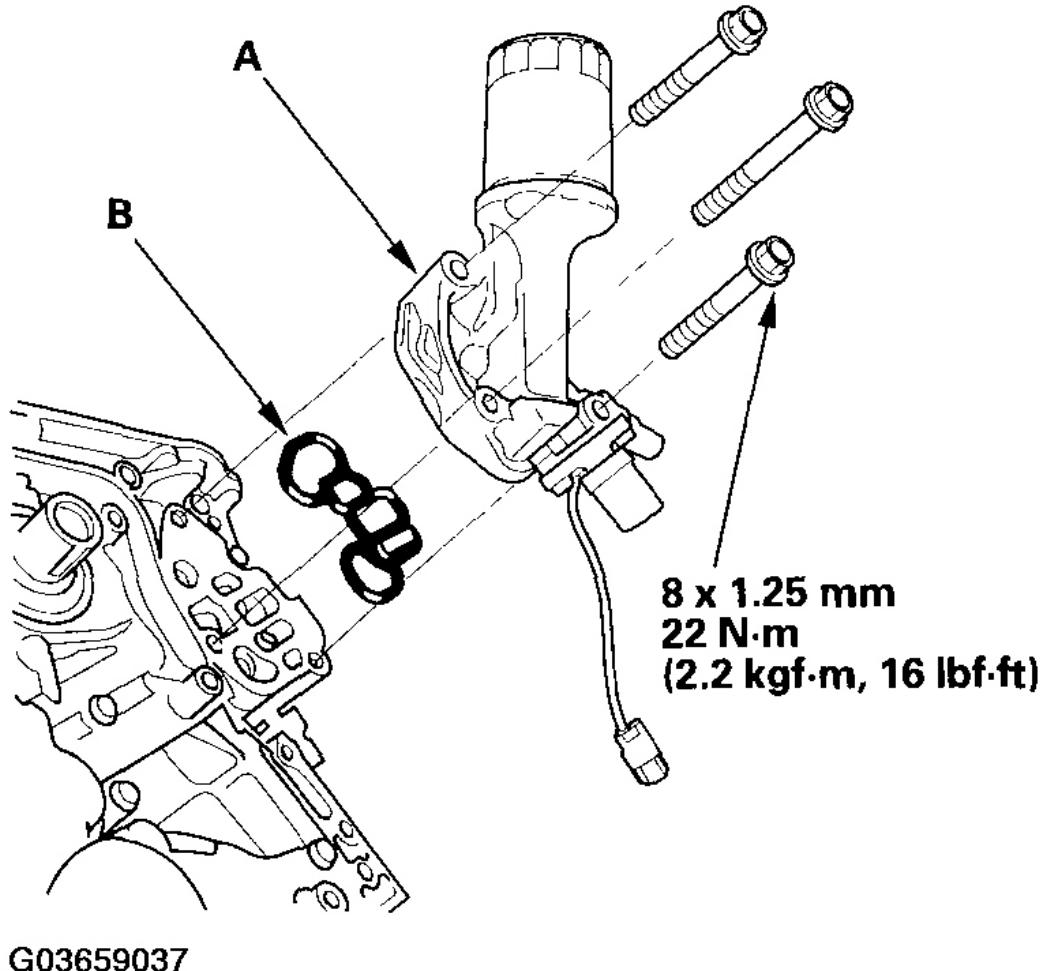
Installing Rocker Arm Oil Control Solenoid With Torque Specifications
